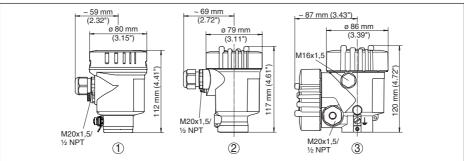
Housing versions in protection IP 66/IP 68 (0.2 bar) - with integrated display and adjustment module the housing is 9 mm/0.35 in higher
